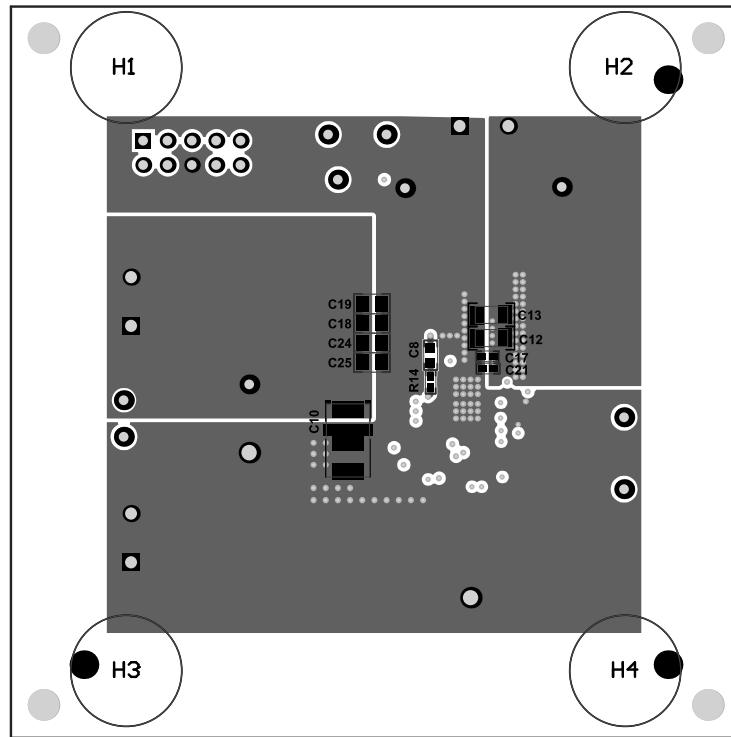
PWR-634EVM Bottom Assembly (Top X-ray View)
